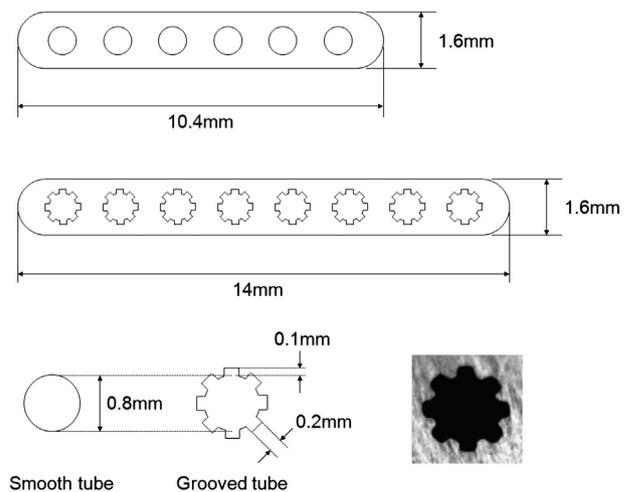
Cross section of the tested mini tubes (unit: mm).
